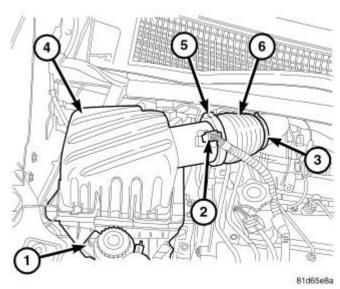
Intake Air Box Courtesy of CHRYSLER LLC
